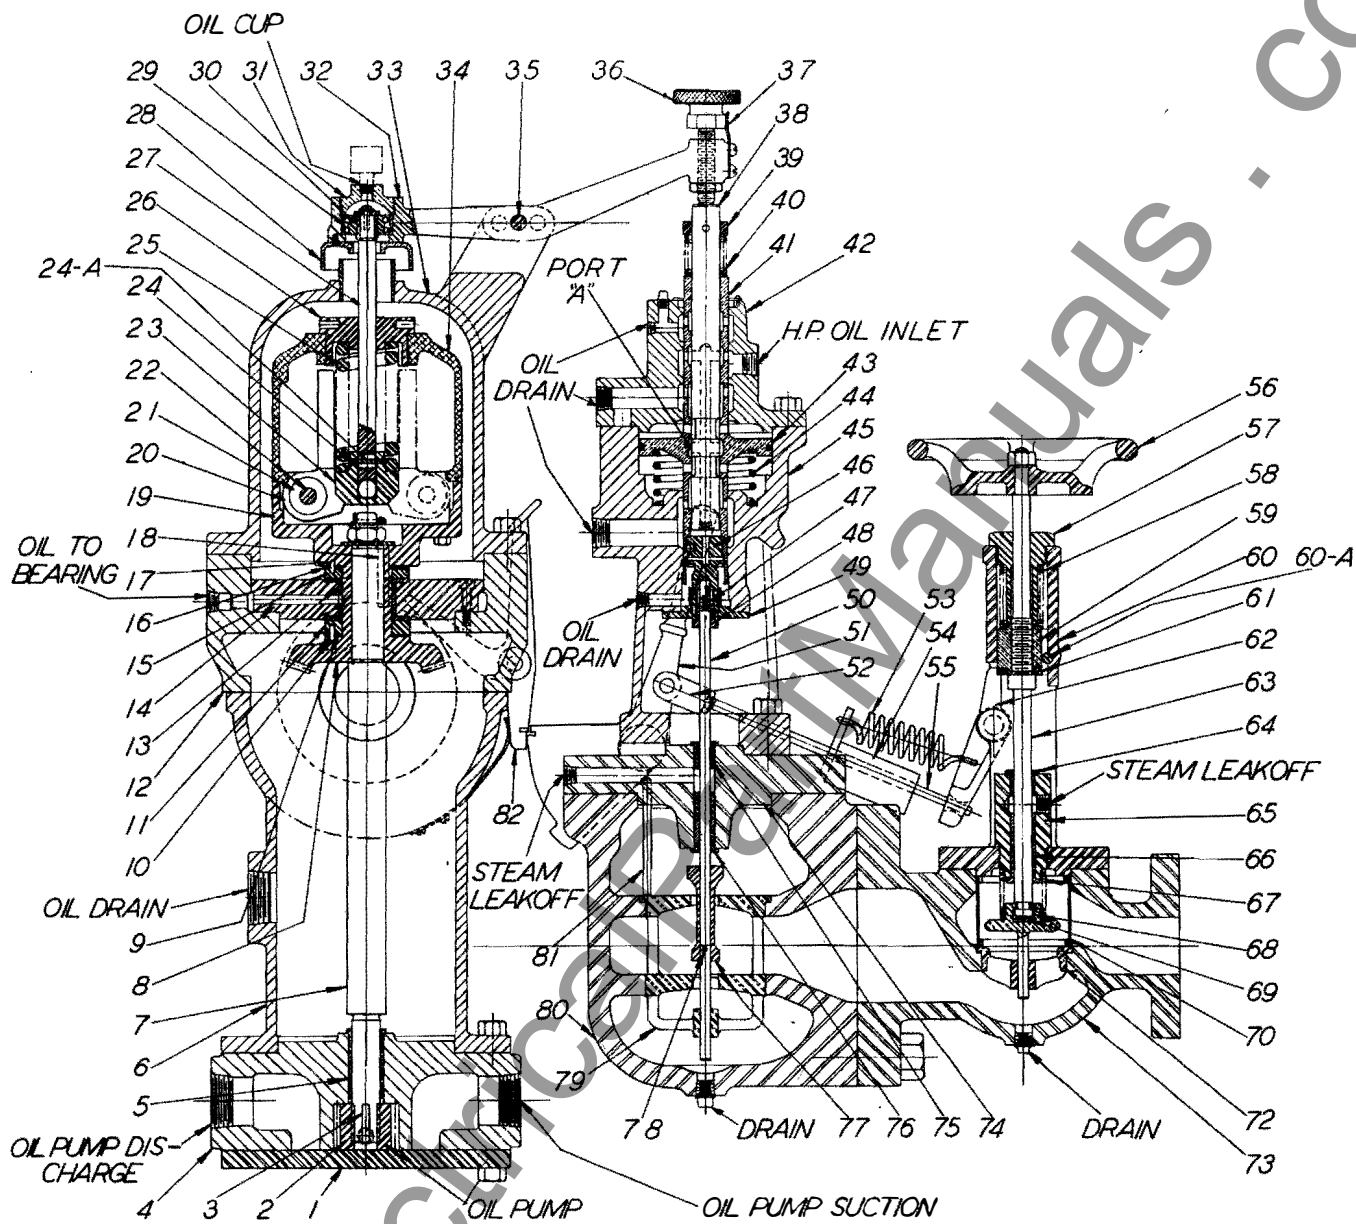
Assembly (Cross-Section Through Governor and Throttle Valve)
